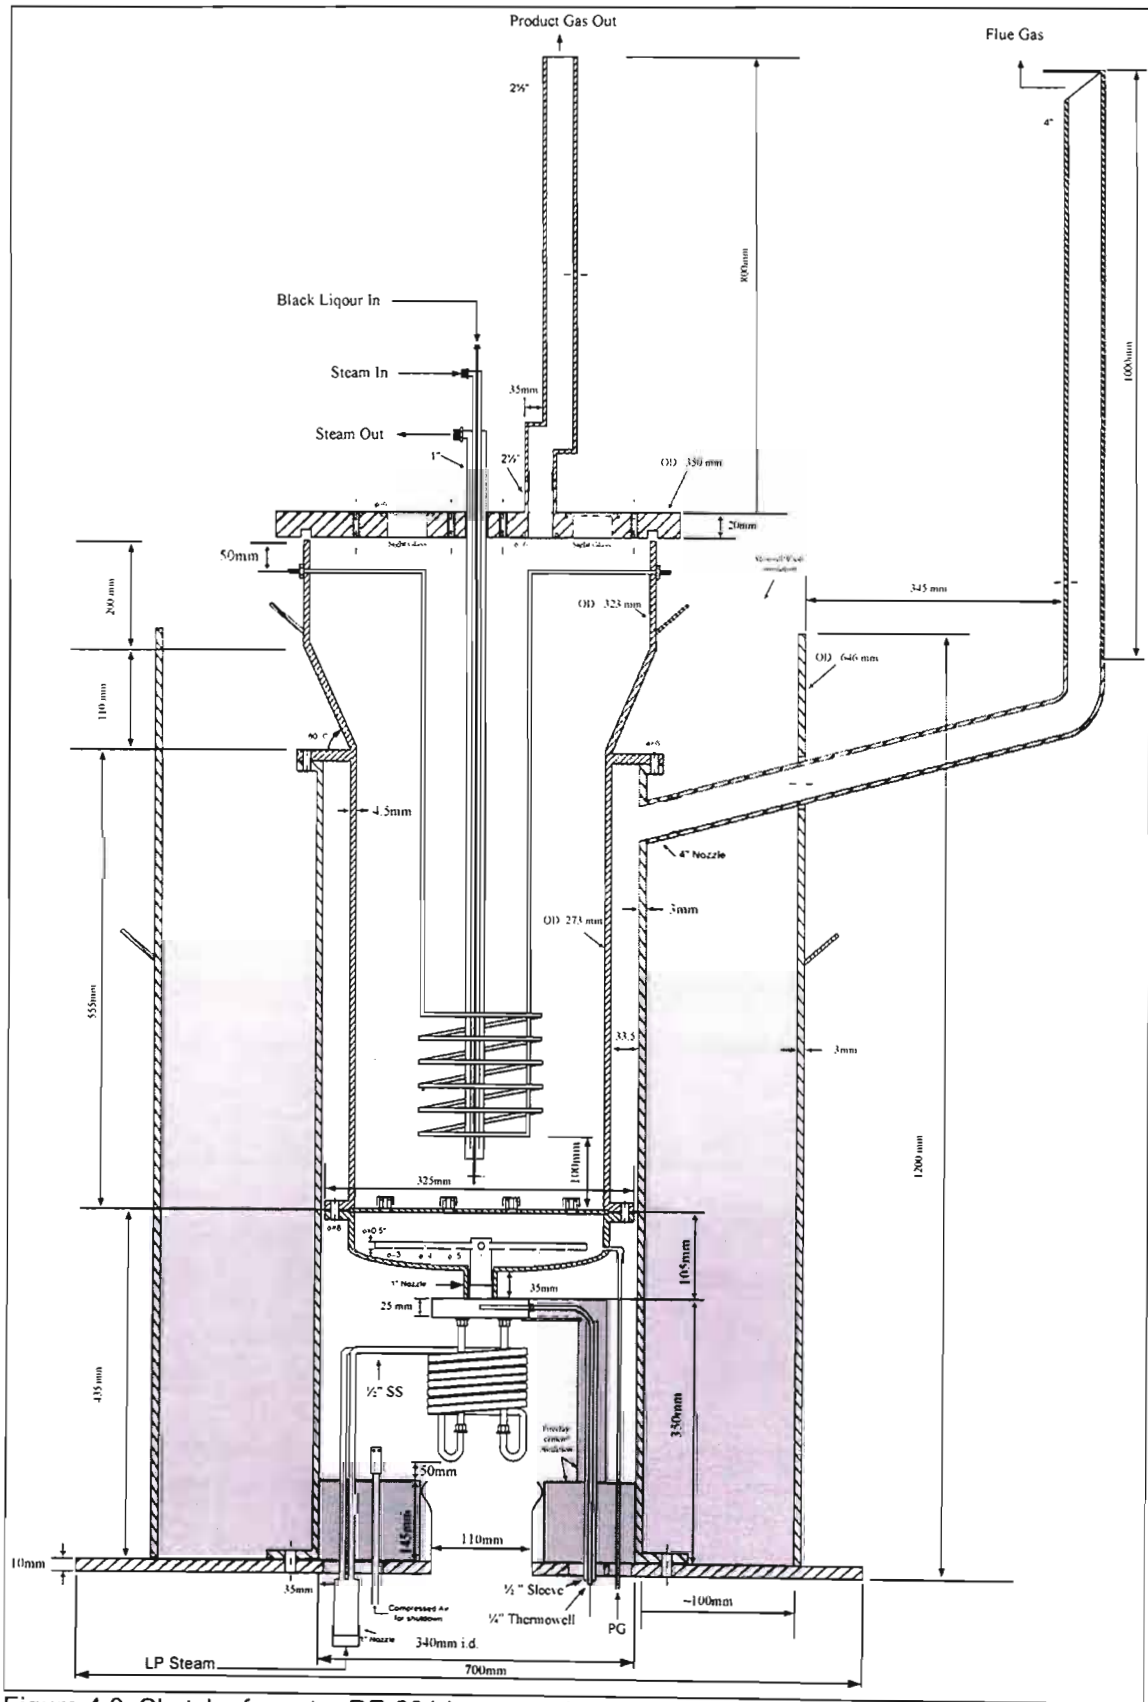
Sketch of reactor RE-201 incorporating steam super heater
